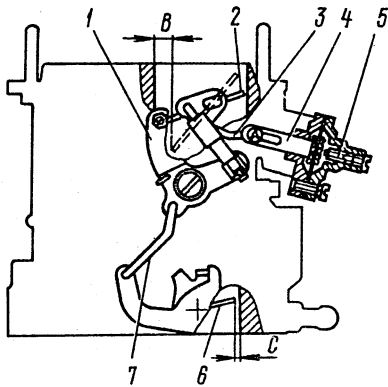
Adjusting the Choke Mechanism Controls:
